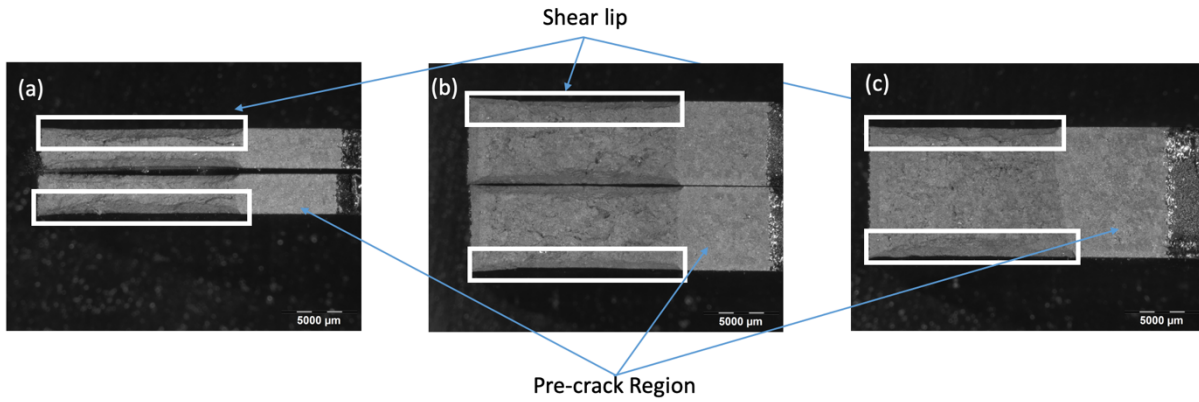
Detailed fracture surface for 3mm(a), 6mm(b) and 9mm(c) CT specimen (Shear lip & pre-crack region)
